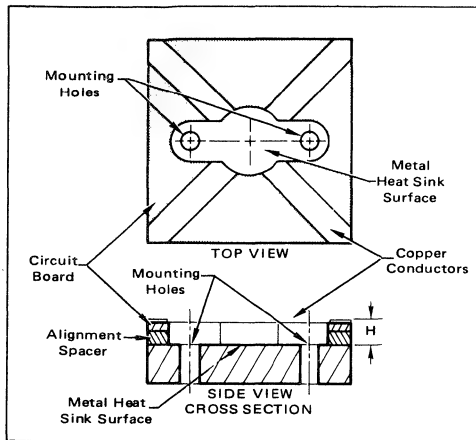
Flange Type SOE Transistor Mounting Method
